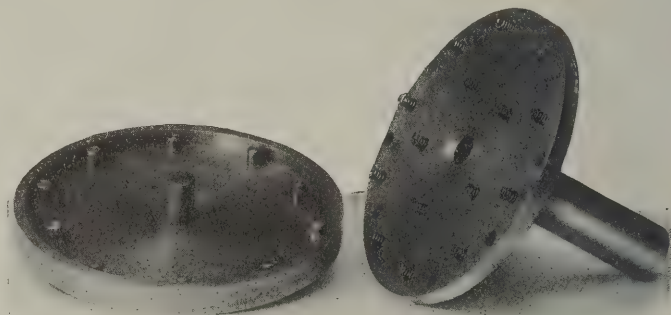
The Two Parts of the Spring-tension or Cushion Friction Disk
